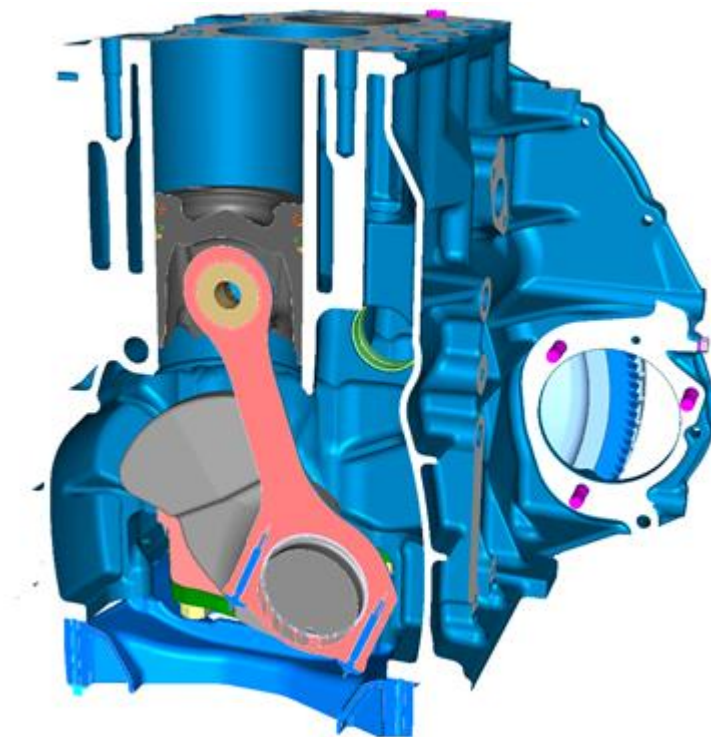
Power Conversion System of 9.0L Heavy Duty Diesel Engine.
